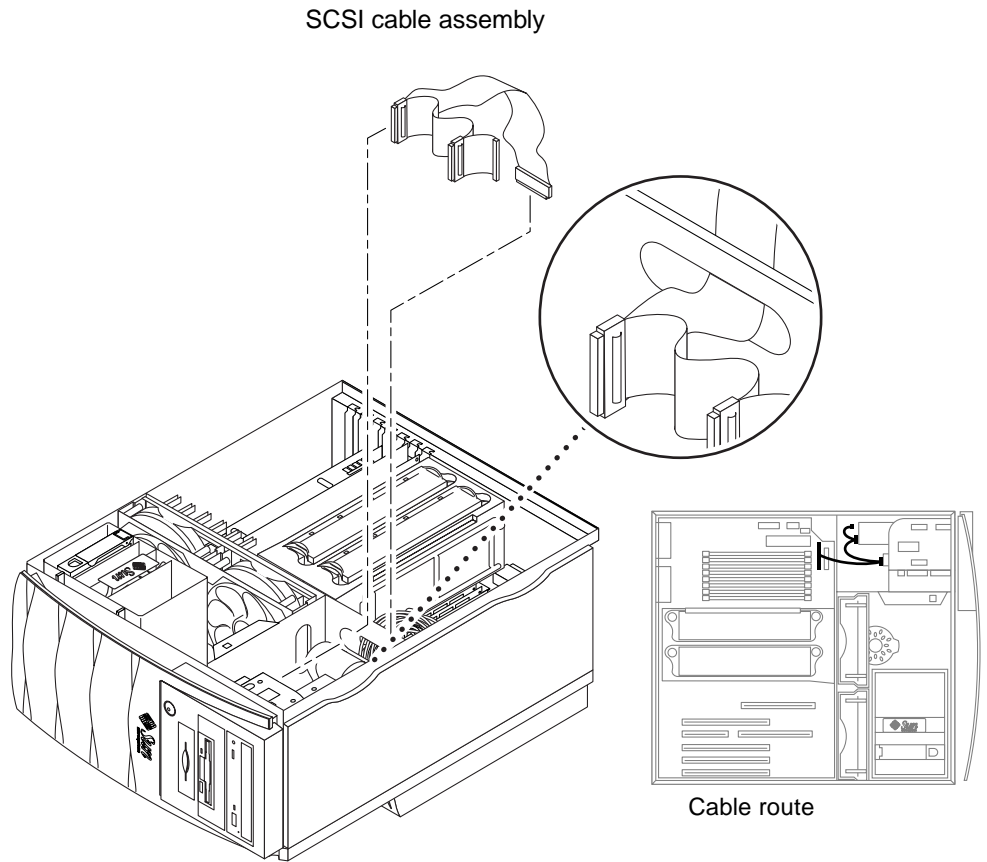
Removing and Replacing the SCSI Cable Assembly
